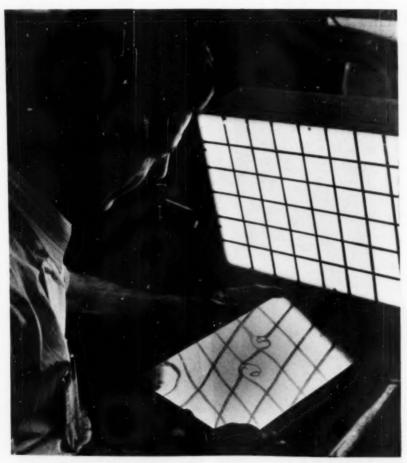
Inspecting a shiny metal surface by viewing a reflected pattern.
